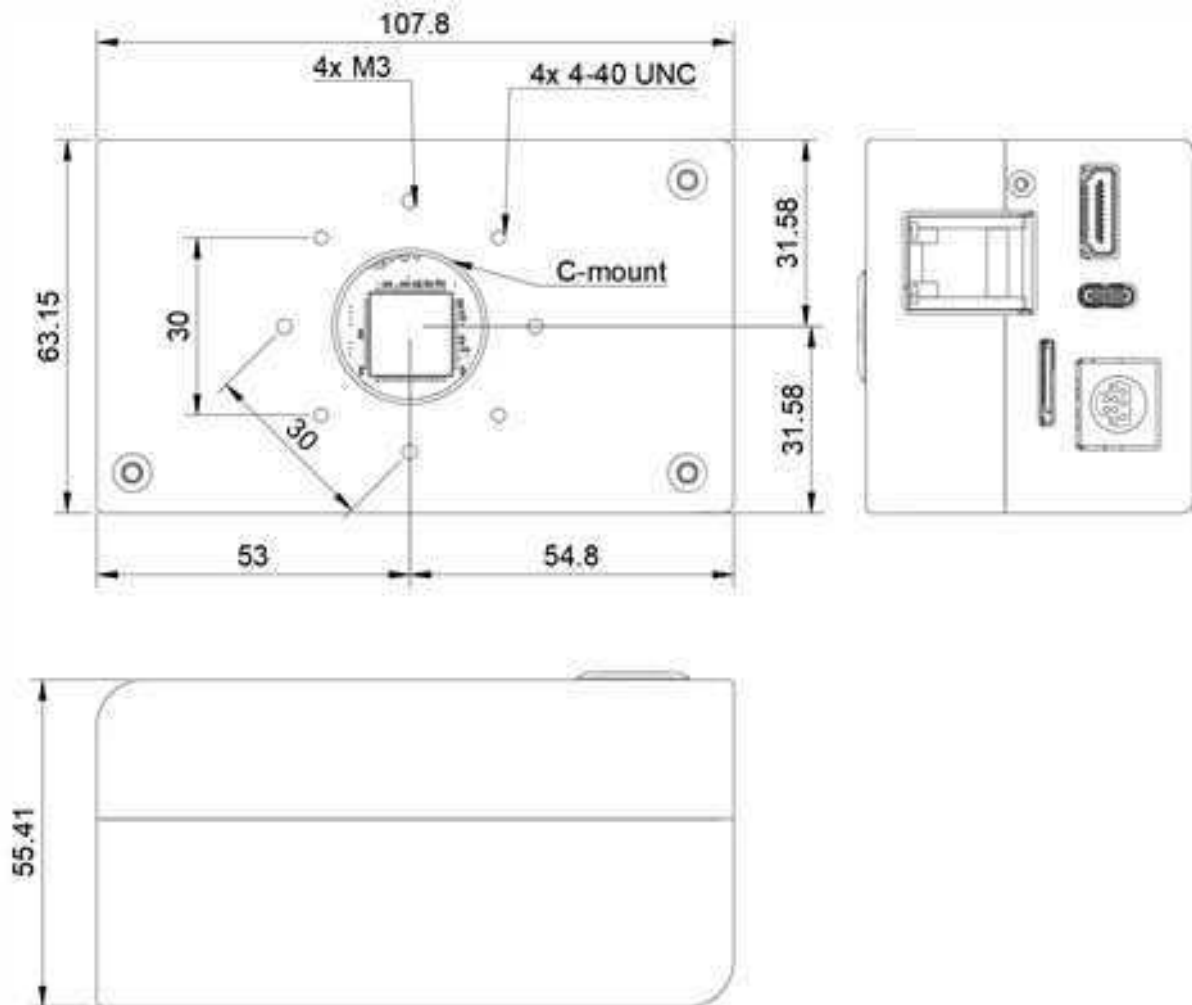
Mechanical layout of the ODIN sensor. All units are in millimeters.
